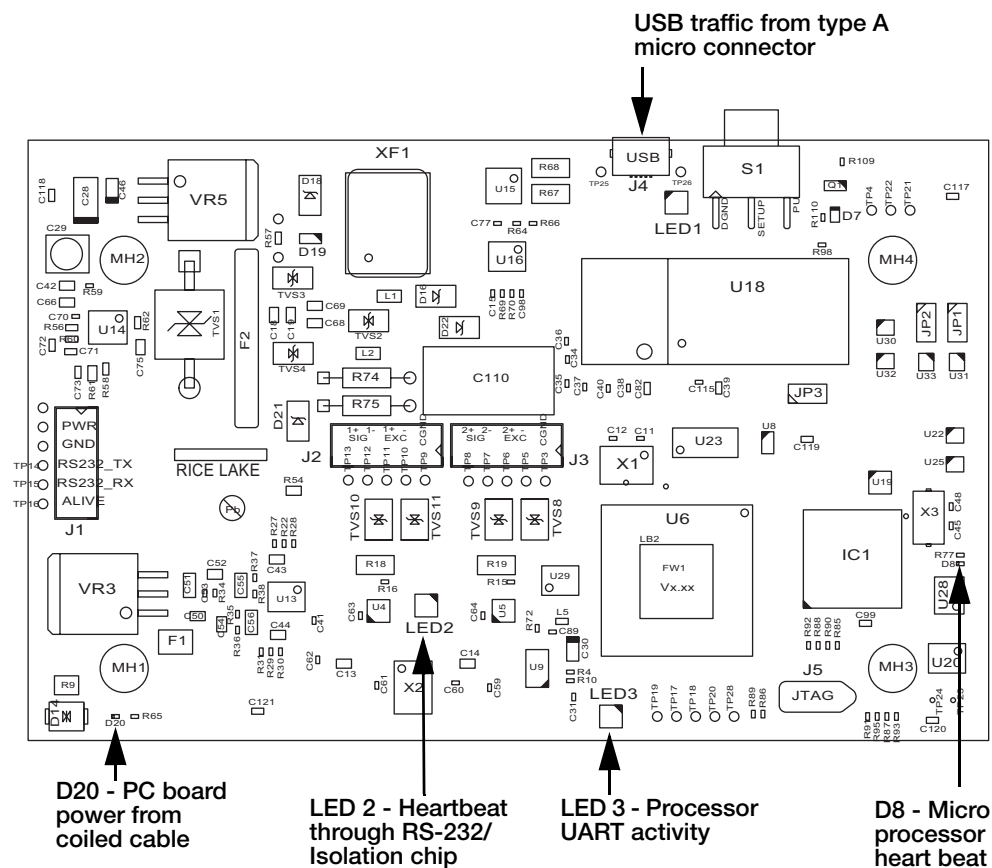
Troubleshooting iQube2 PCB Assembly LEDs (PN 162508)
